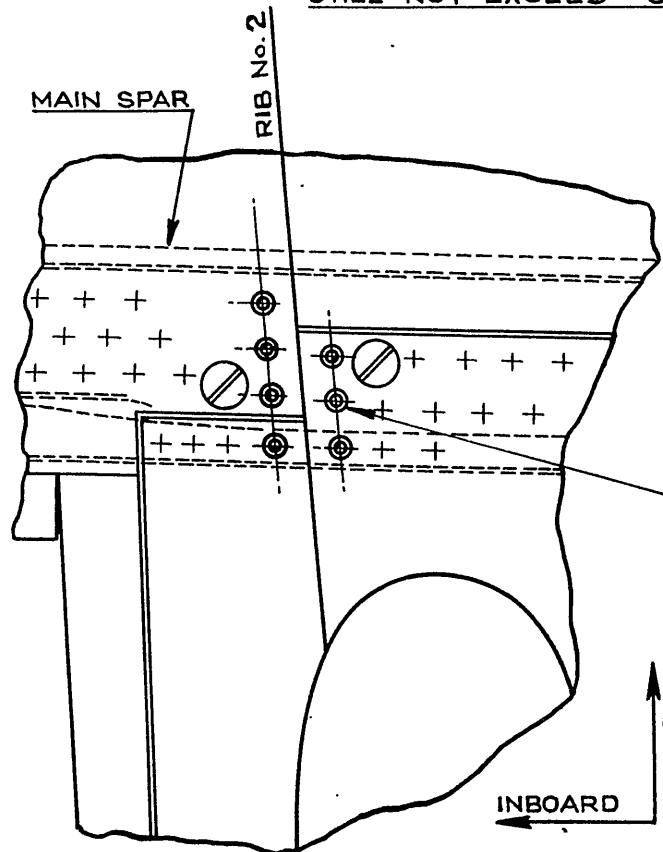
PART VIEW ON UNDERSIDE OF WING
